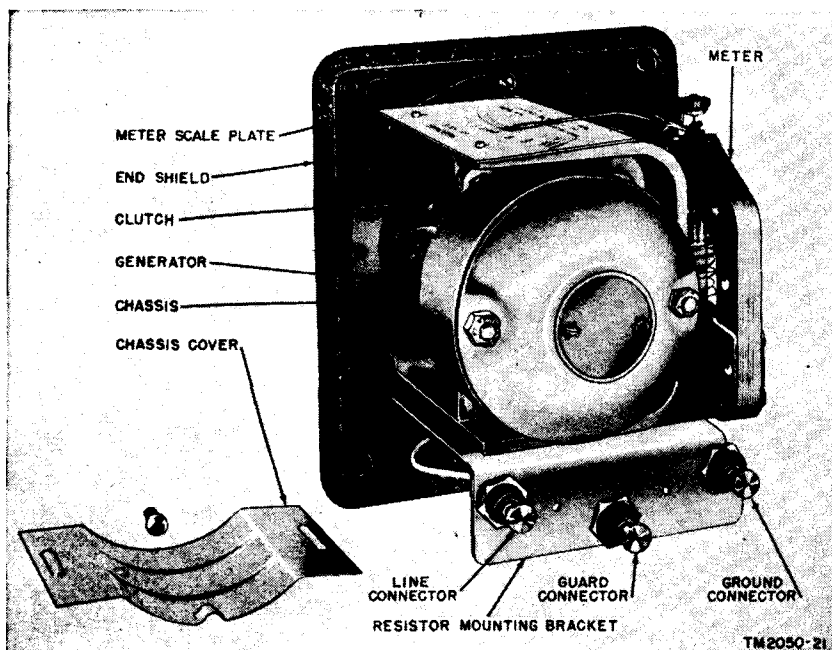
End shield and chassis assembly of ohmmeter ZM-21A/U.
